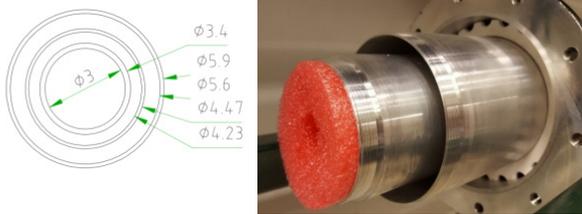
Blumlein tubing (Al). Dimensions are given in inches. Flanges are 8'' in diameter. Sections are joined by 10 bolts evenly distributed at 7'' diameter. Inner tubes are joined by 1''- long threaded strip-like collars. The Macor insulator that separates the conductors is visible inside.
